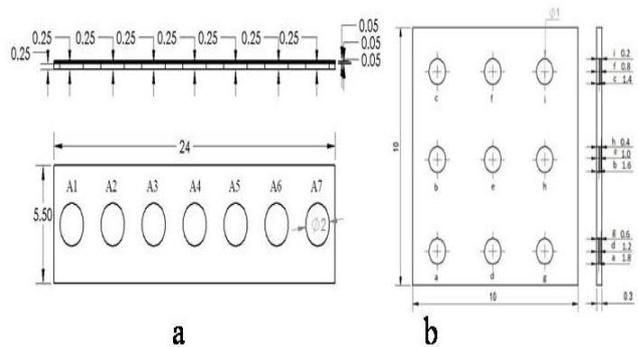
a. Layout of modeled bone sample b. Layout of CFRP sample.
